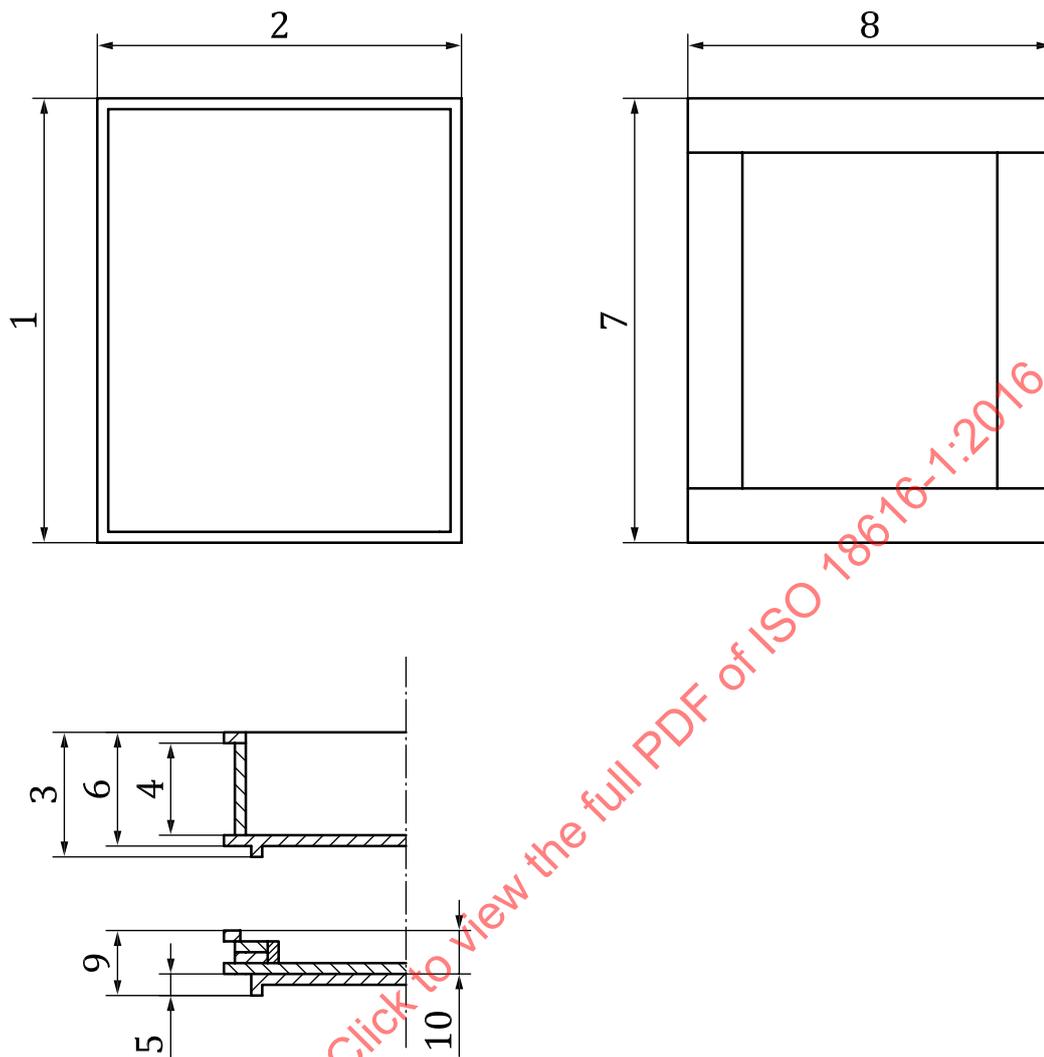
Foldable box without plan view dimensions changed (1 = 7 and 2 = 8)
